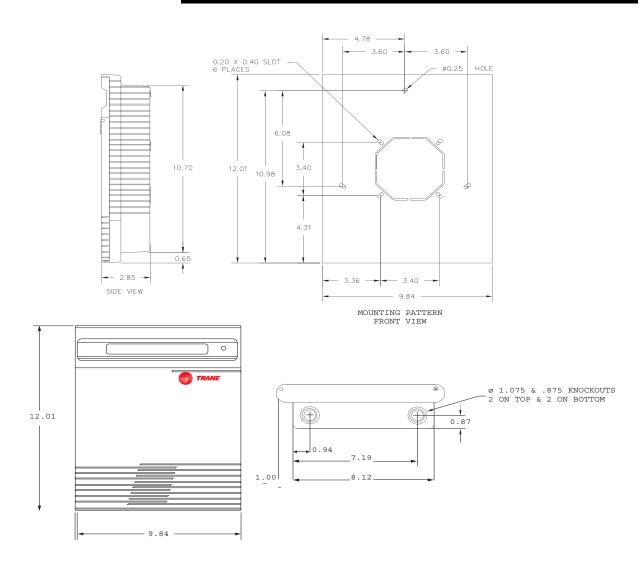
Remote CLD Panel Mounting Holes and Electrical Access Knockouts
